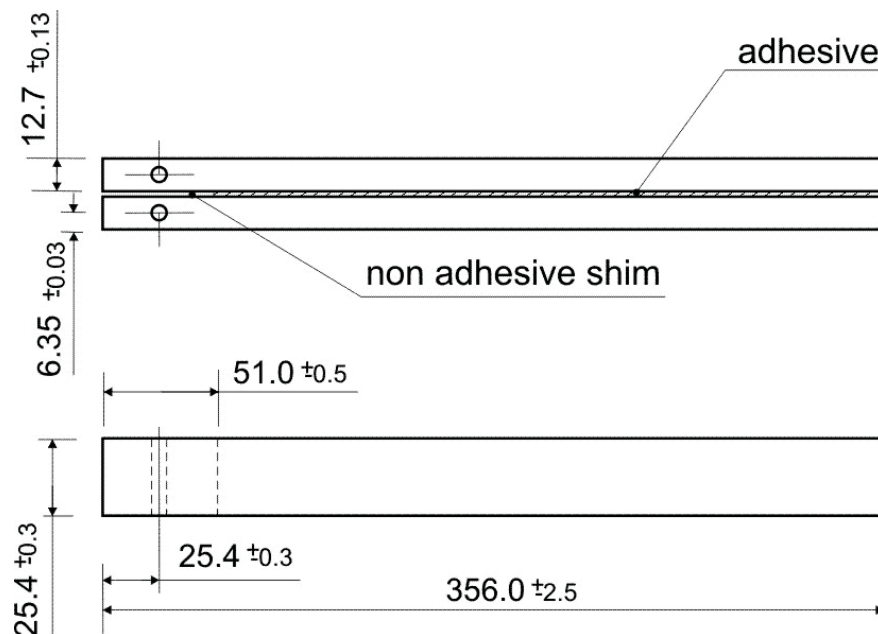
Double cantilever beam specimen geometry as defined in ASTM D3433 (dimension in mm) [18].
